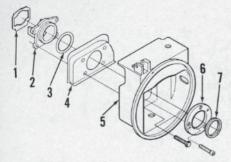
Exploded view of carburetor chamber assembly.
